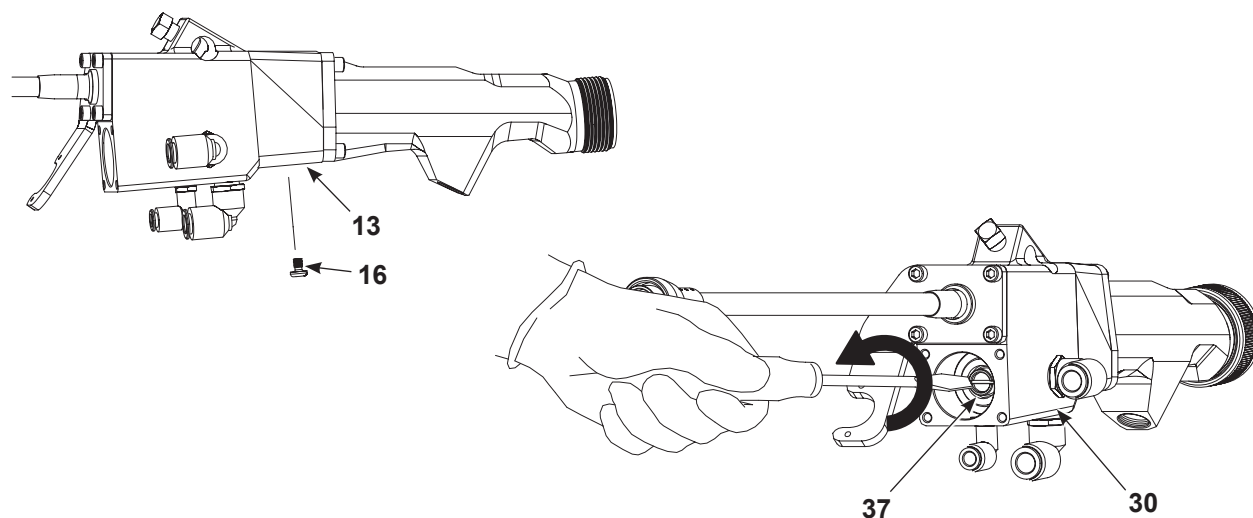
Disconnecting the Connecting Rod from the Pull Shaft
